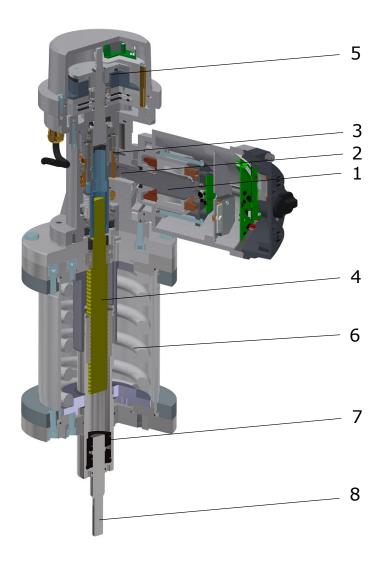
1... Motor, 2... Worm gear stage, 3... Planetary gear train, 4... Ball screw, 5... Electrical holding brake, 6... Spring, 7... spring-loaded spindle pin, 8... valve stem
